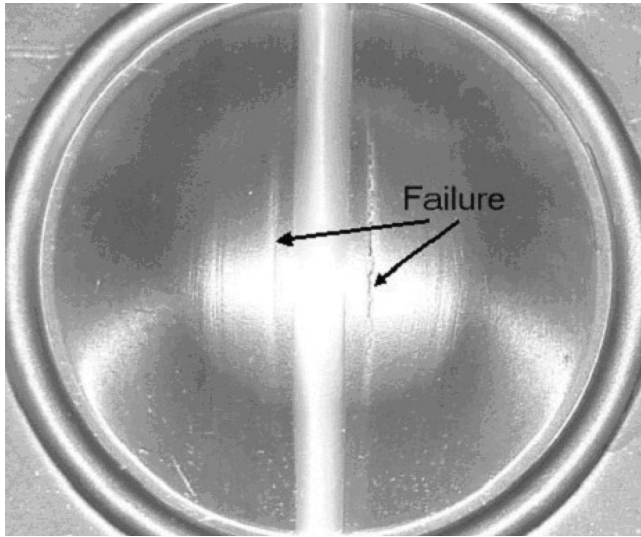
Failure in alloy 6022-T4 during full dome LDH tests occurred in the HAZ, on either side of the weld, for all of the FSW specimens. For GTAW specimens, many of the failures occurred in the weld.
